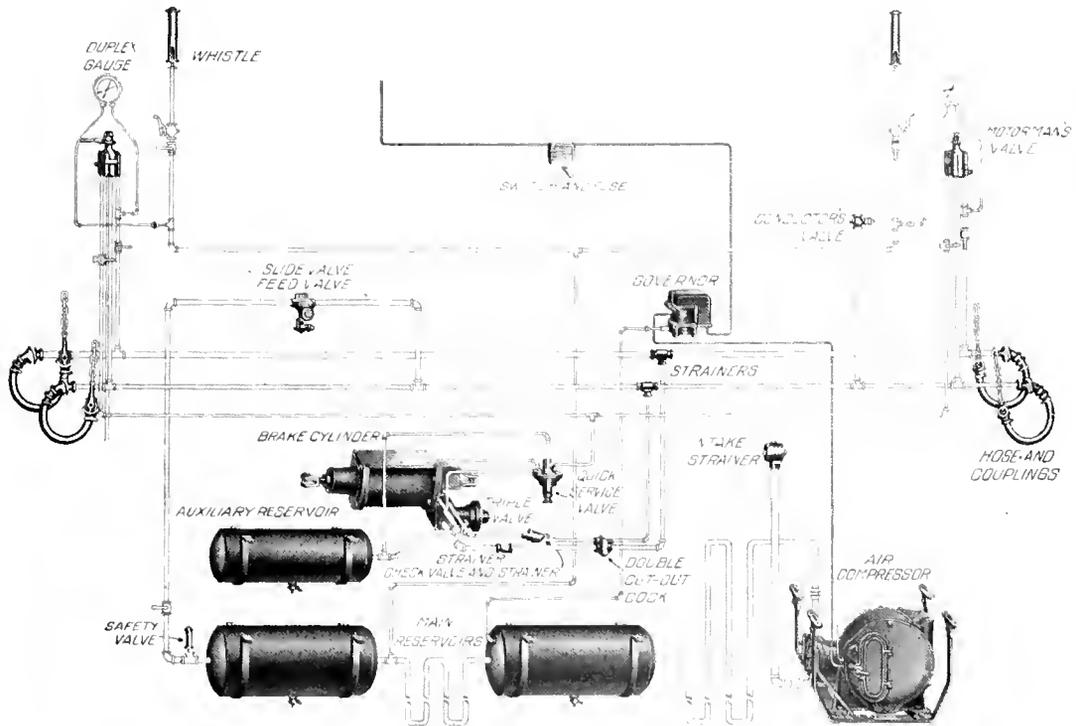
Combined Straight and Automatic Air Brake Equipment for Motor Car
